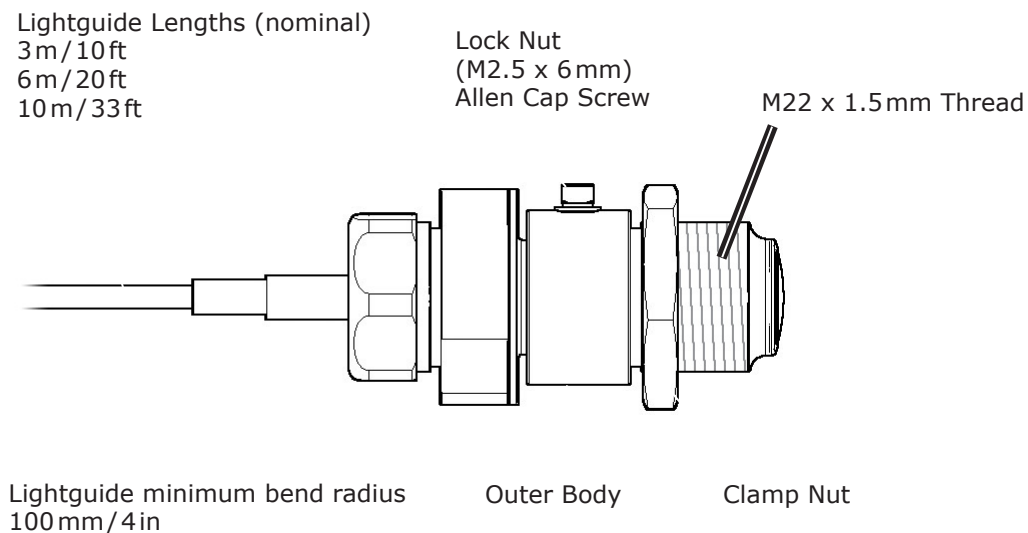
SPOT+ Fibre-optic thermometer optic head installation dimensions
